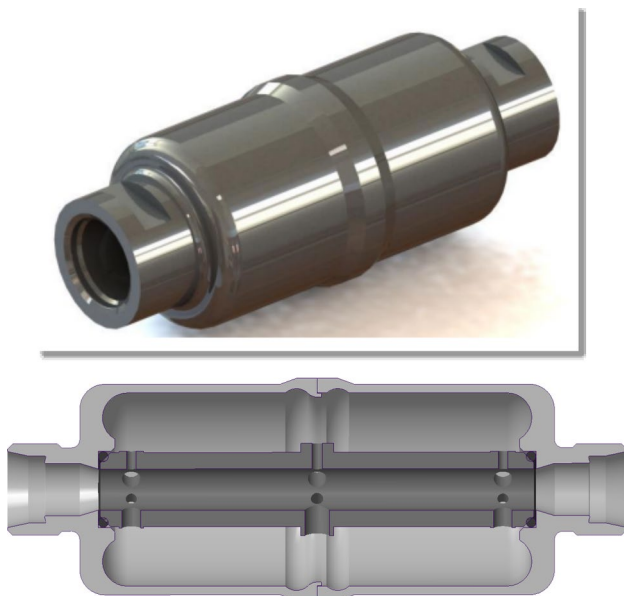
MHR cylindrical attenuator design with outer resonator and multiple necks in the inner tube (Hydac)
